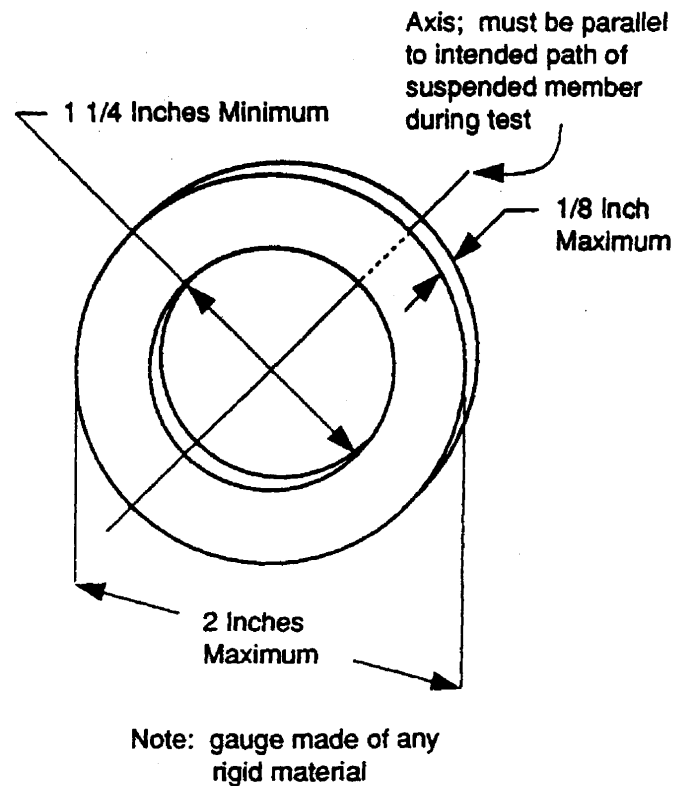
Protrusion Test Gauge for Suspended Swing Assemblies
